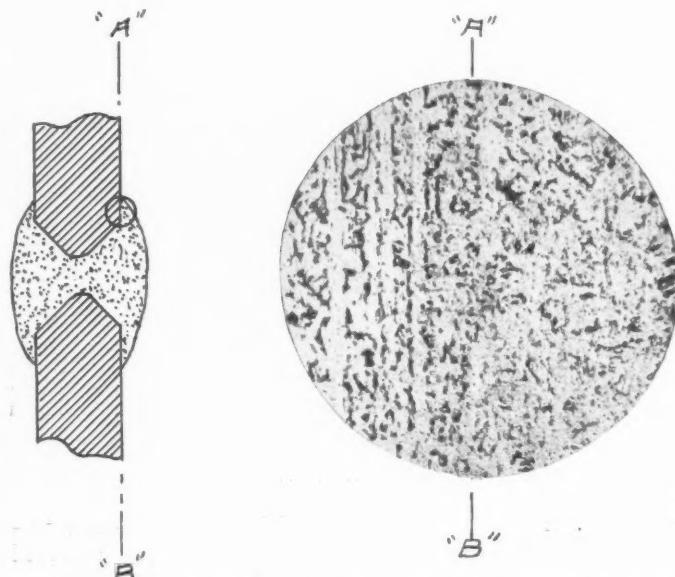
Section of a Weld Made with a Current Between 150 and 160 Amperes
